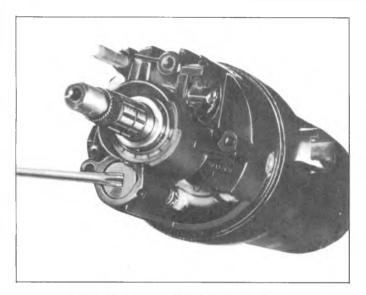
B-76-Removing Tilt Lever Spring Retainer
